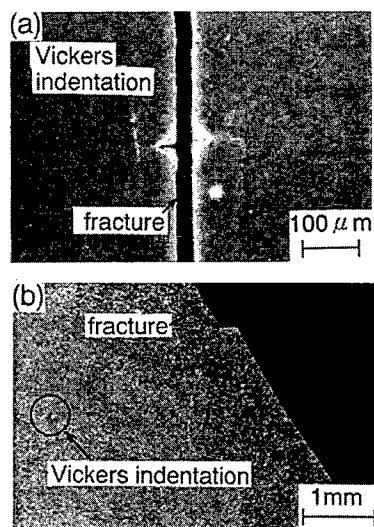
Crack path(a) fracture initiated from indented crack (b)fracture initiated outside pre-cracked zone.
